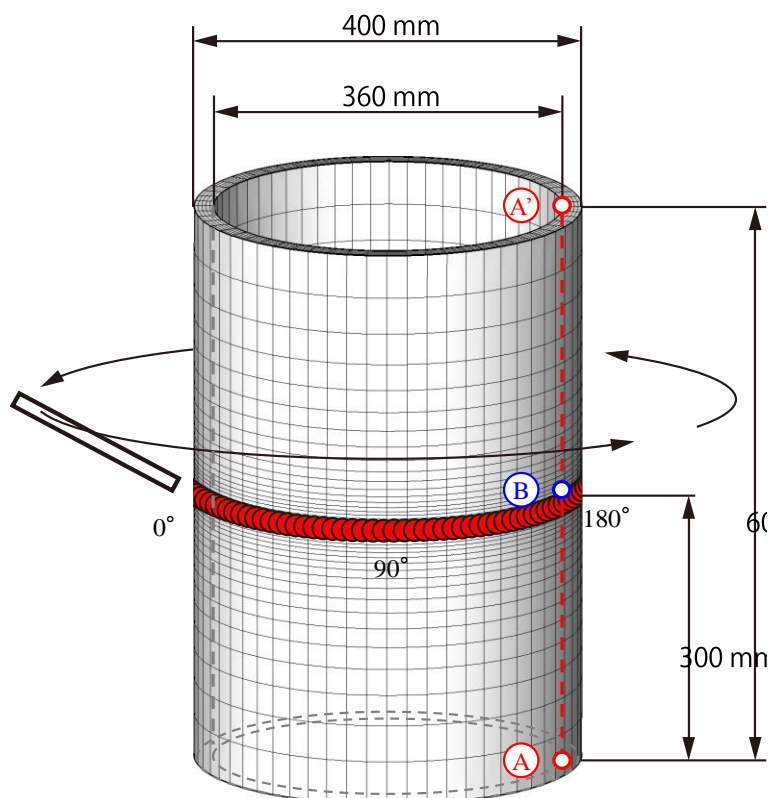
Analysis model of circumferential welding of pipe.
